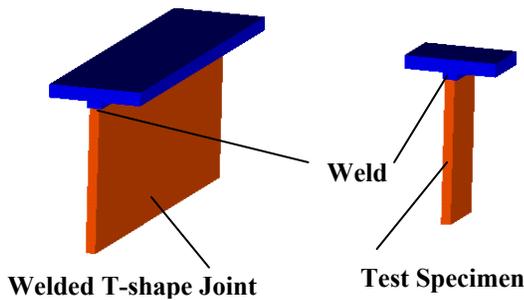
Model of welded T-shape butt joint (consists from welded together T-element and molded plaques. For T-element thickness of the weld bead is 6 mm. Thickness
